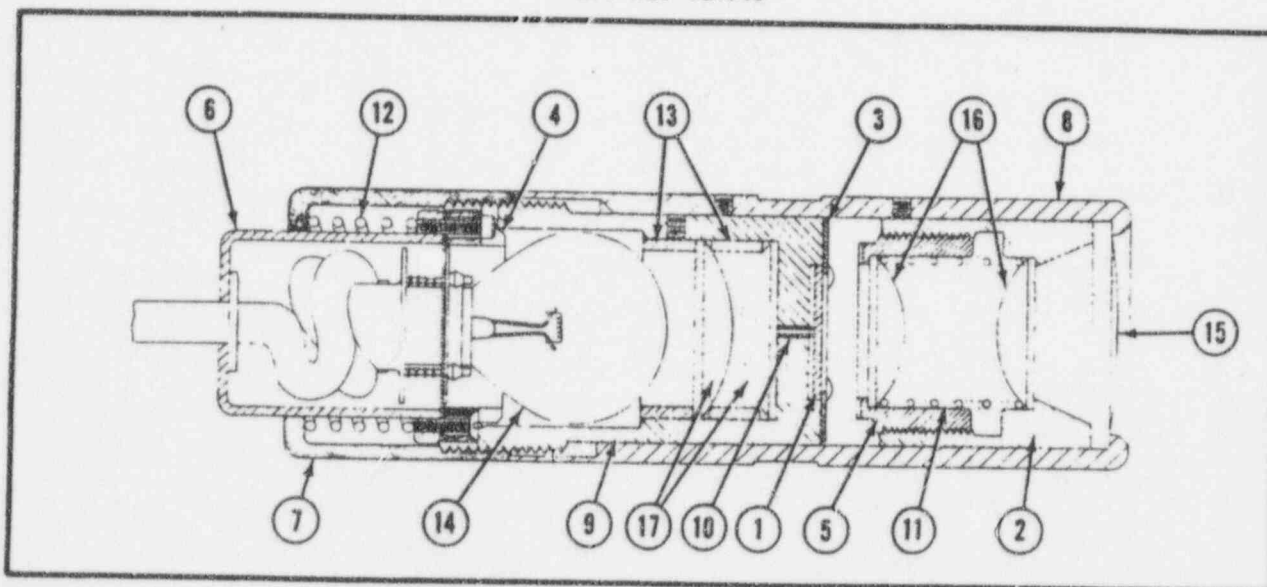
OPTICAL INDICATOR ASSEMBLY
